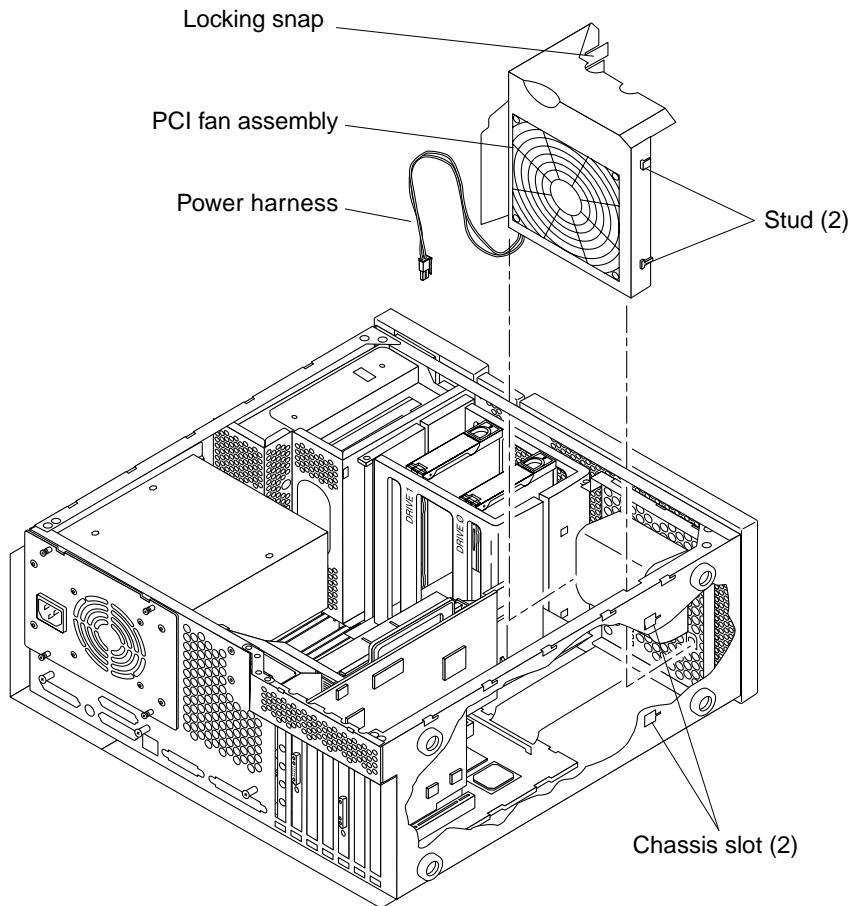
Removing and Replacing the PCI Fan Assembly
